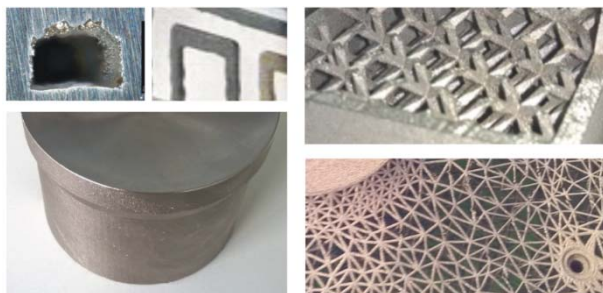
Additive manufactured mould (left bottom), cooling channels (left top) and examples of possible inner (right top) and outer (right bottom) structures.
